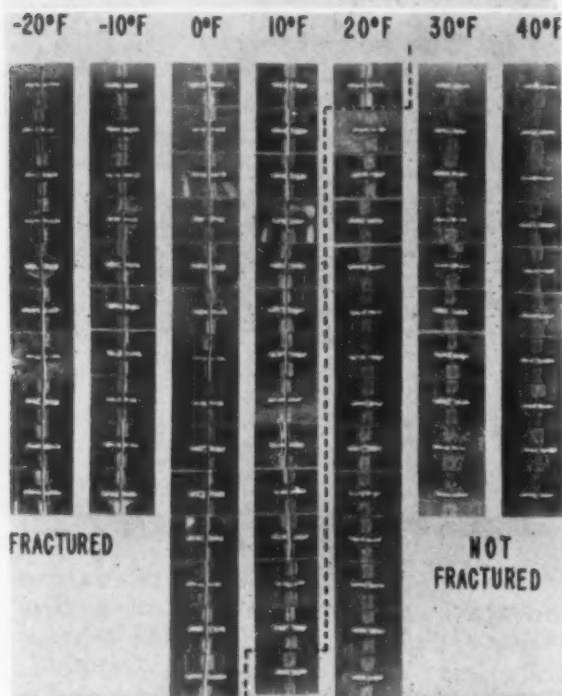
Specimens from 1-in. steel plate (center sections shown) show test reproducibility.
